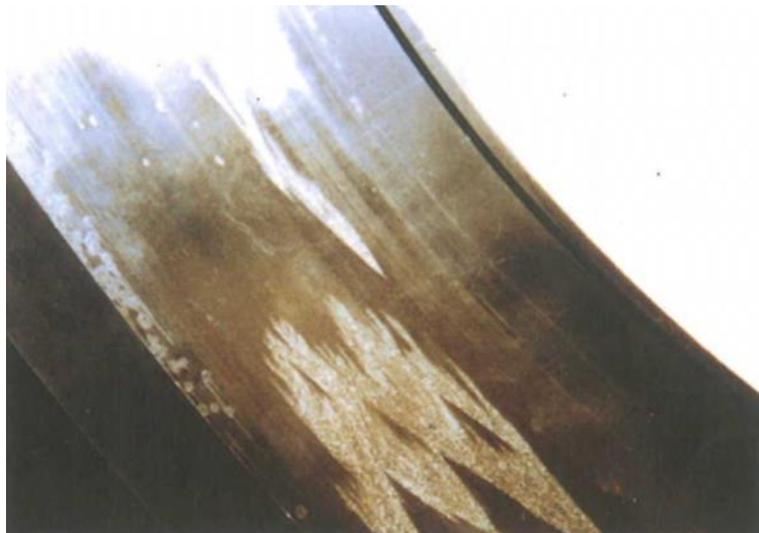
Adhesive wear damage in the outer ring raceway of a cylindrical roller bearing (Schaeffler Technologies, 2012).
